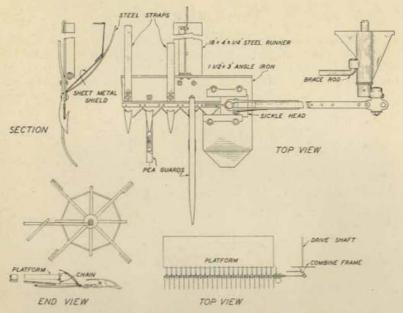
Detail of the Hume-Love cutter bar and mounting.
